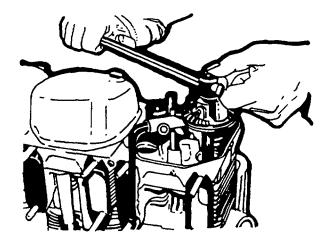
Tightening Cylinder Head Bolts with Tool 003-0500
